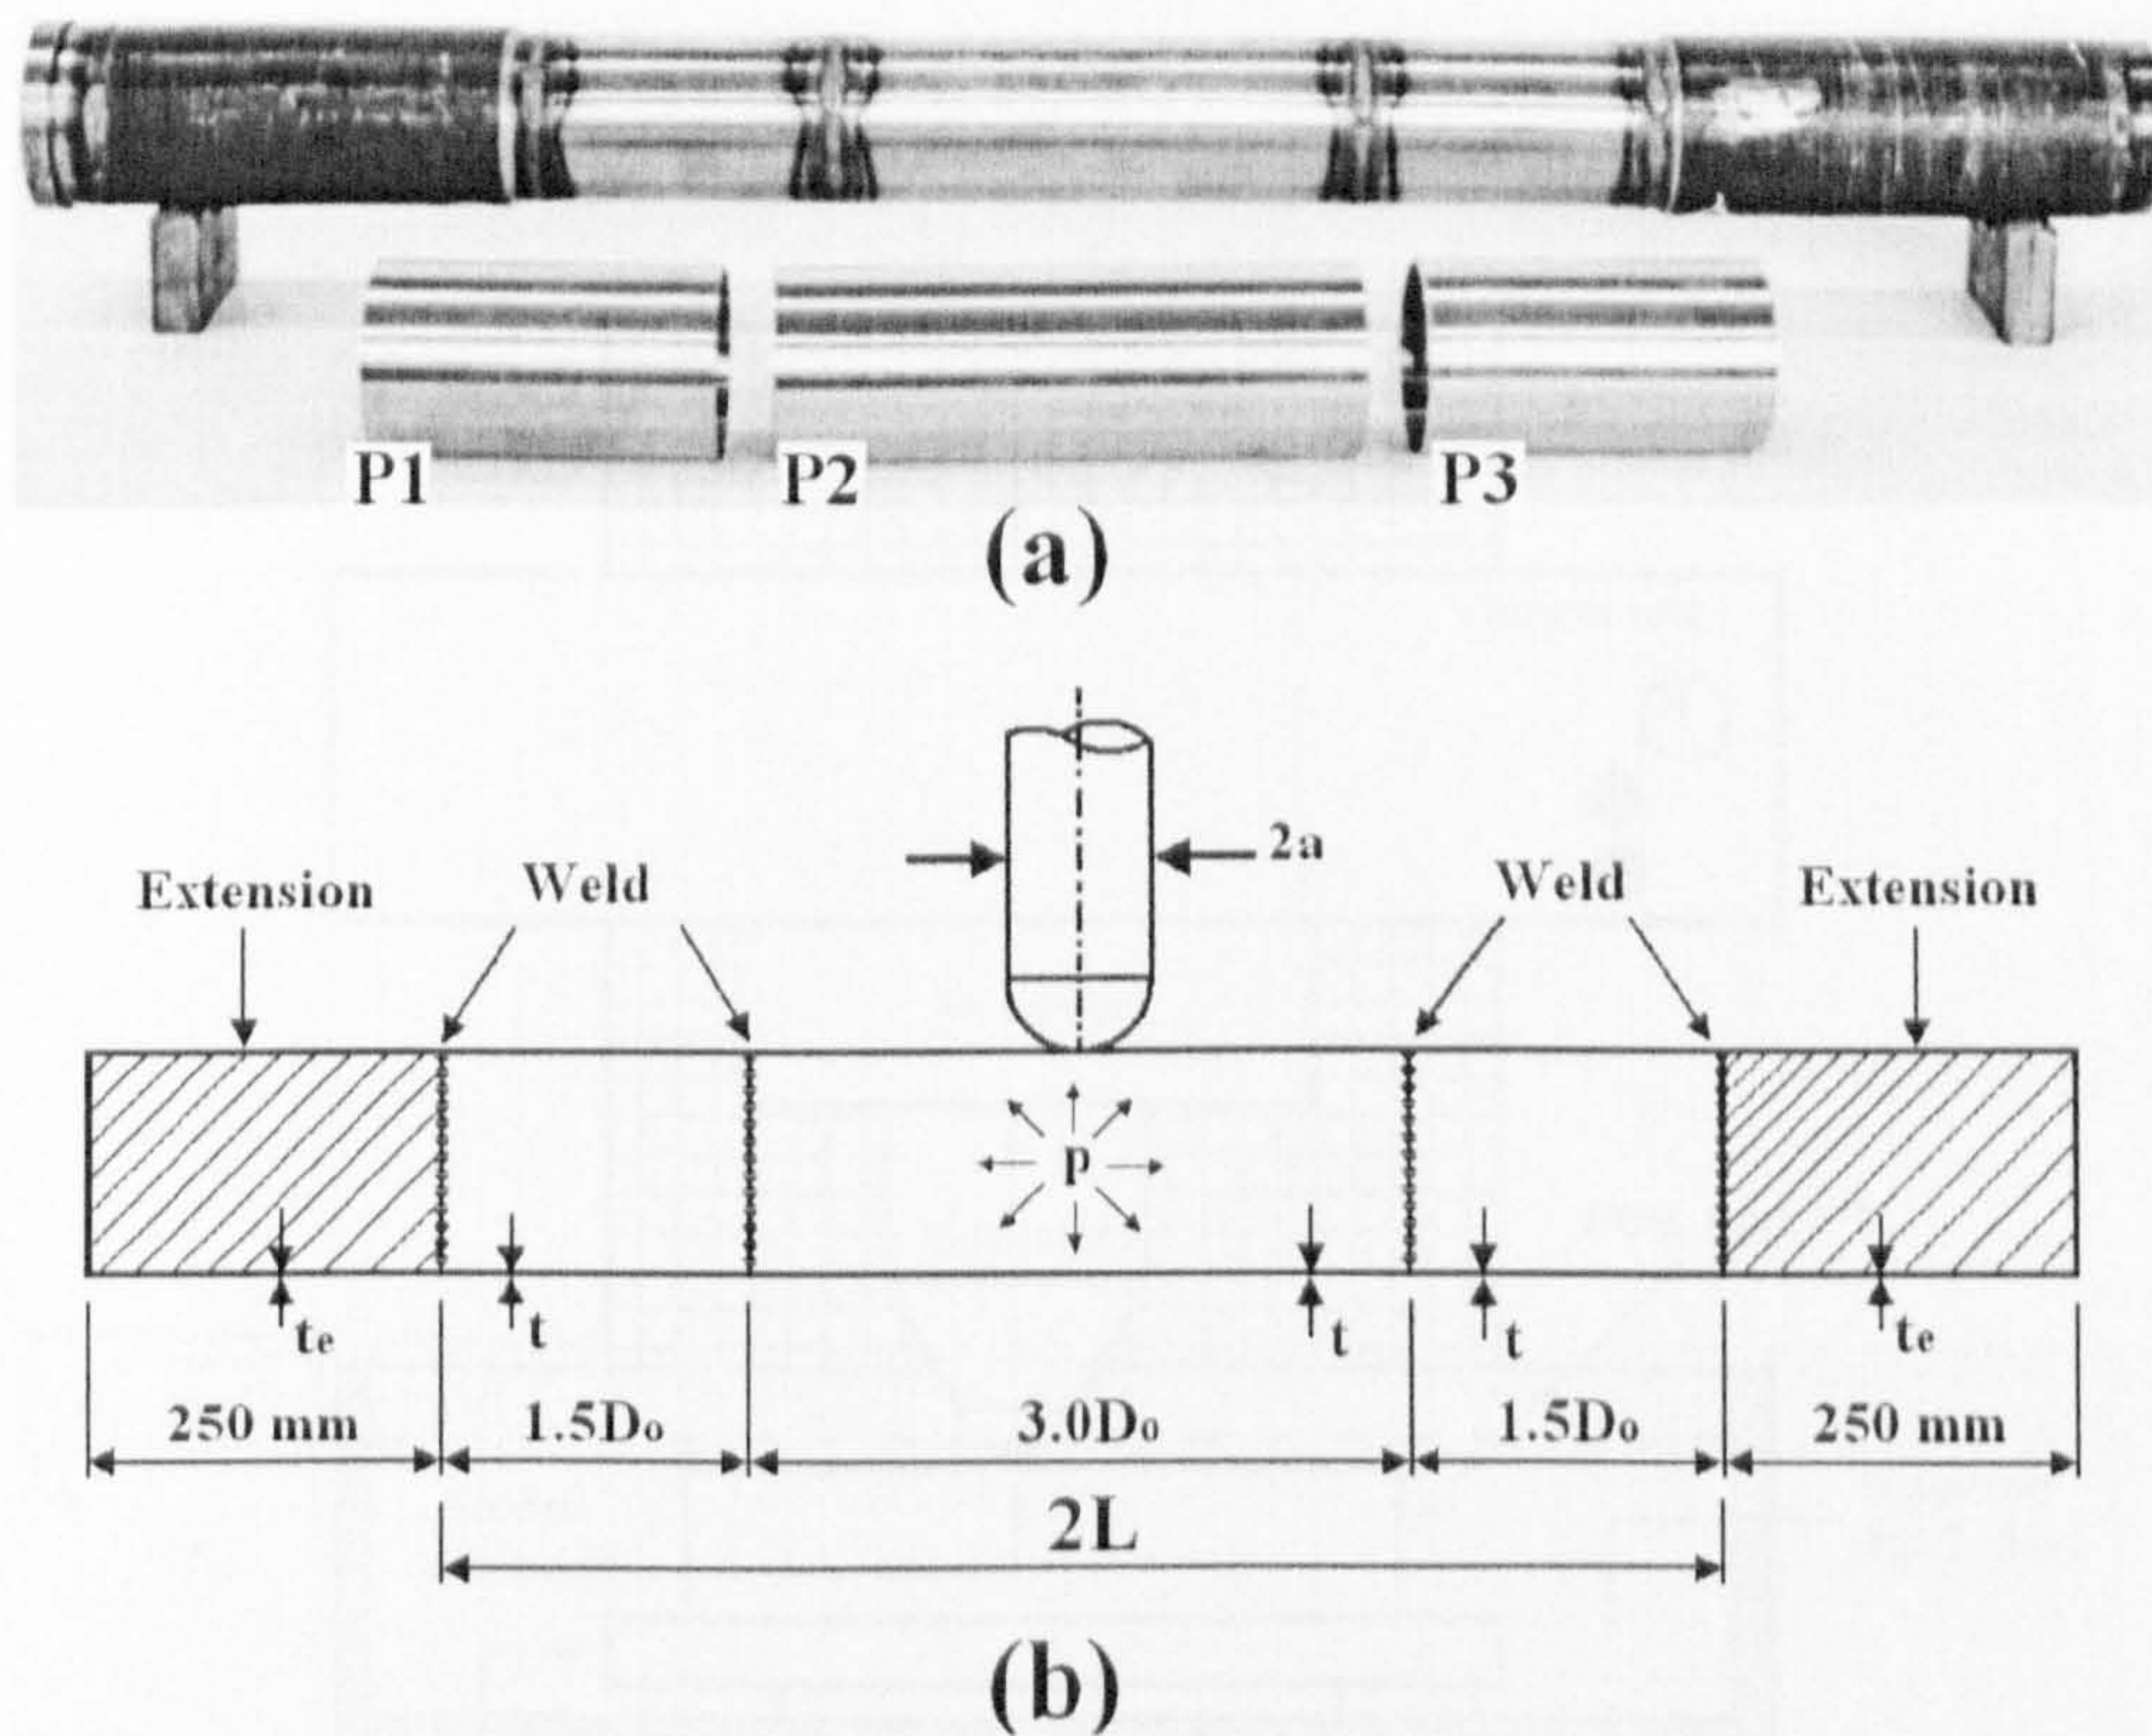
View of parts P1, P2, and P3 after CNC machining, and after welding. Two thicker extensions at both ends are also shown - Fig. 6.1a. Sketch depicting dimensions of various parts together with a vertical indenter - Fig. 6.1b.
